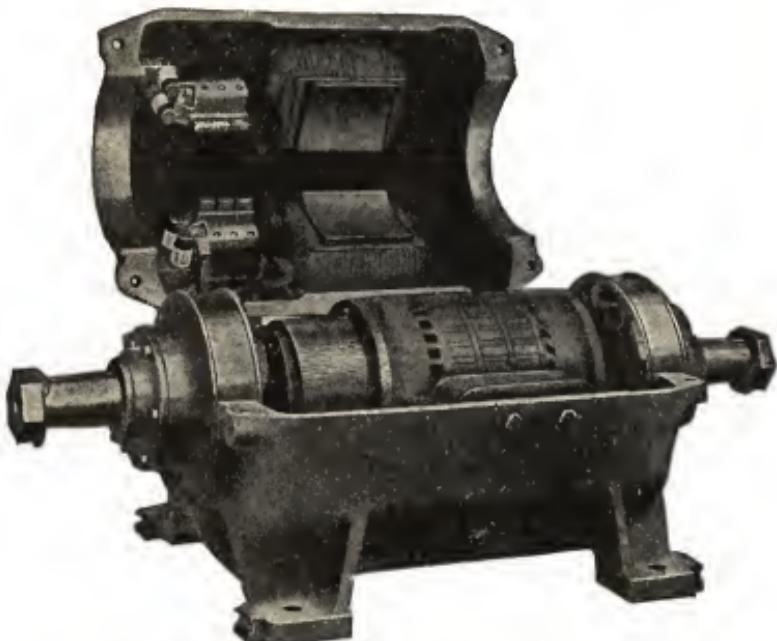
A Mill Type Motor Opened Up for Inspection or Repairs
